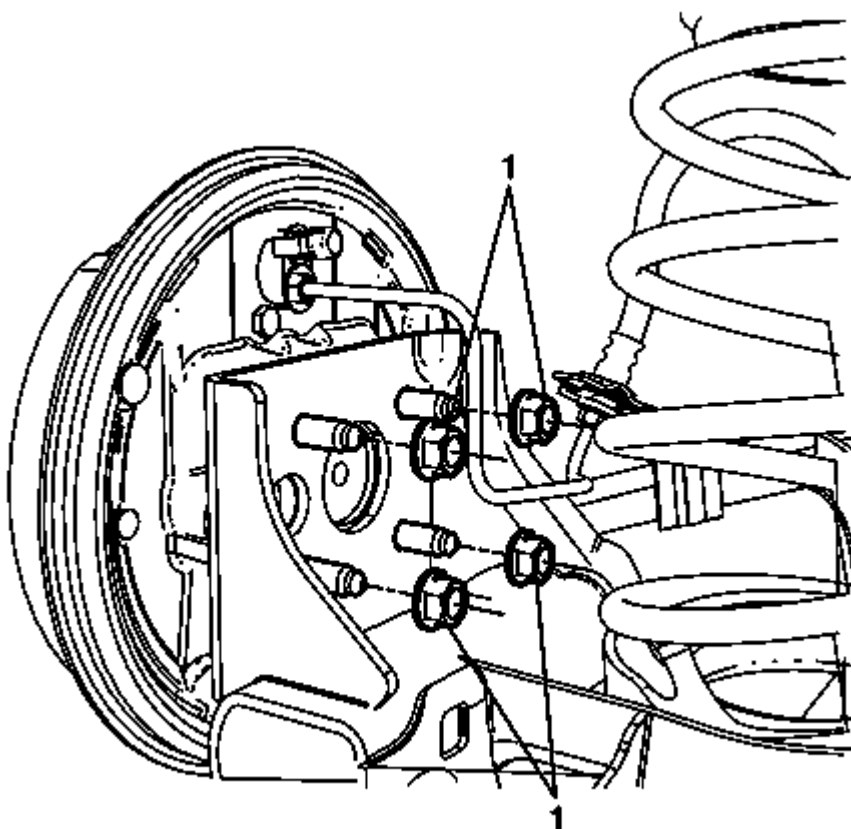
Wheel Bearing/Hub And Spindle Assembly And Rear Axle Retaining Nuts
